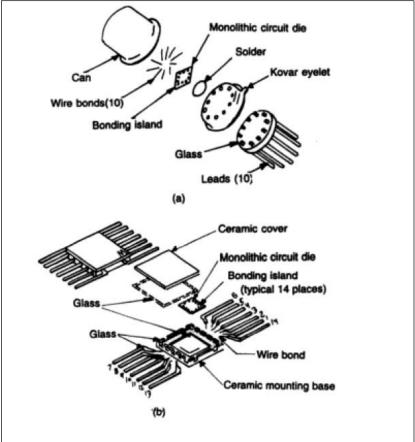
Exploded view of (a) Lead TO-5 package (b) 14 - lead version of flat package
